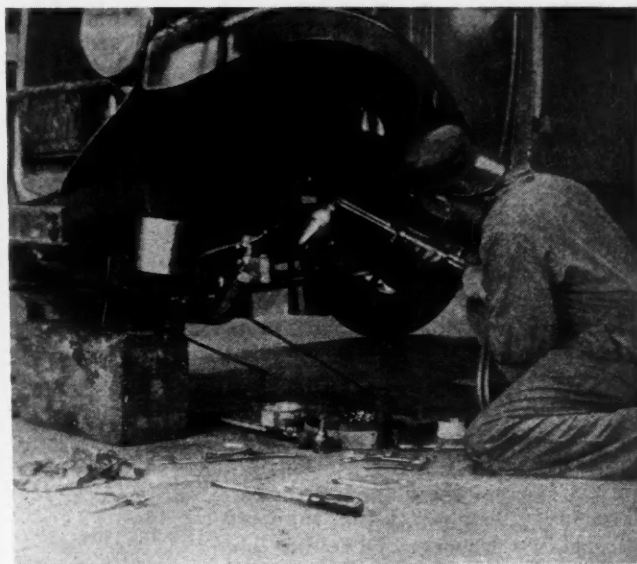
Rivets on the front spring perch came loose and the welder blew the rivet heads off in a jiffy with the welding torch flame
